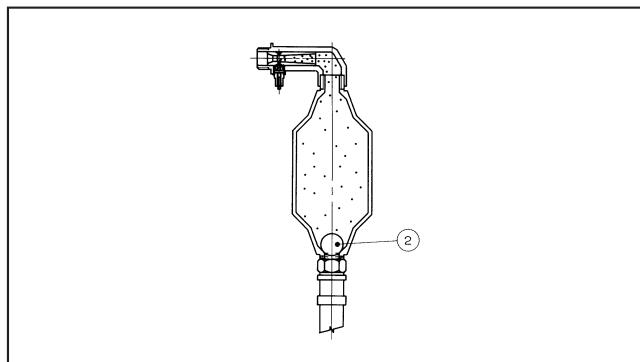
The air accumulated inside the body pushes the rubber ball (2) to the bottom, thus blocking the passage. At this point the valve closes and the rubber ball prevents the air accumulated inside the body of the air supply unit from reaching the pump intake.
